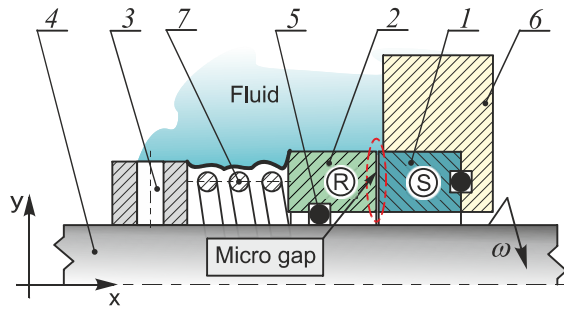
Diagram of the FMR-type contactless face seal. 1 – Stator, 2 – Rotor, 3 – Connecting element, 4 – Shaft, 5 – O-ring, 6 – Casing, 7 – Spring.
